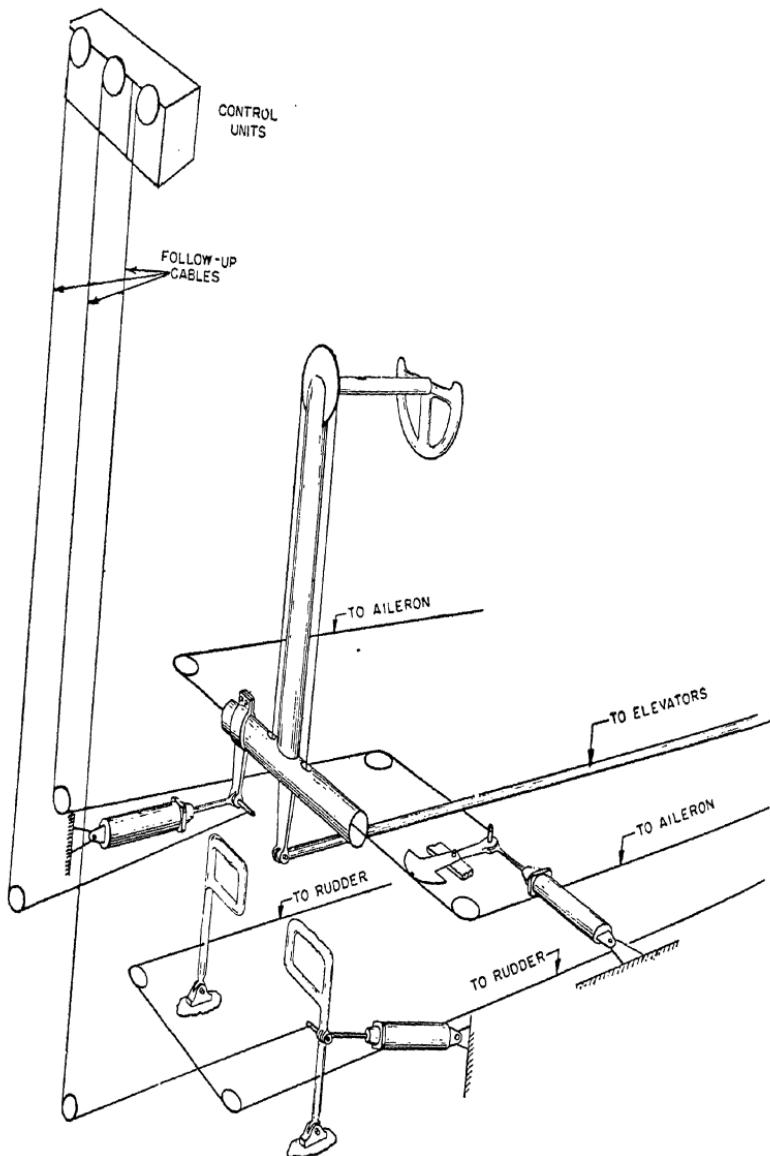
Suggested Method of Attaching Servo Units, Push-Pull Type
